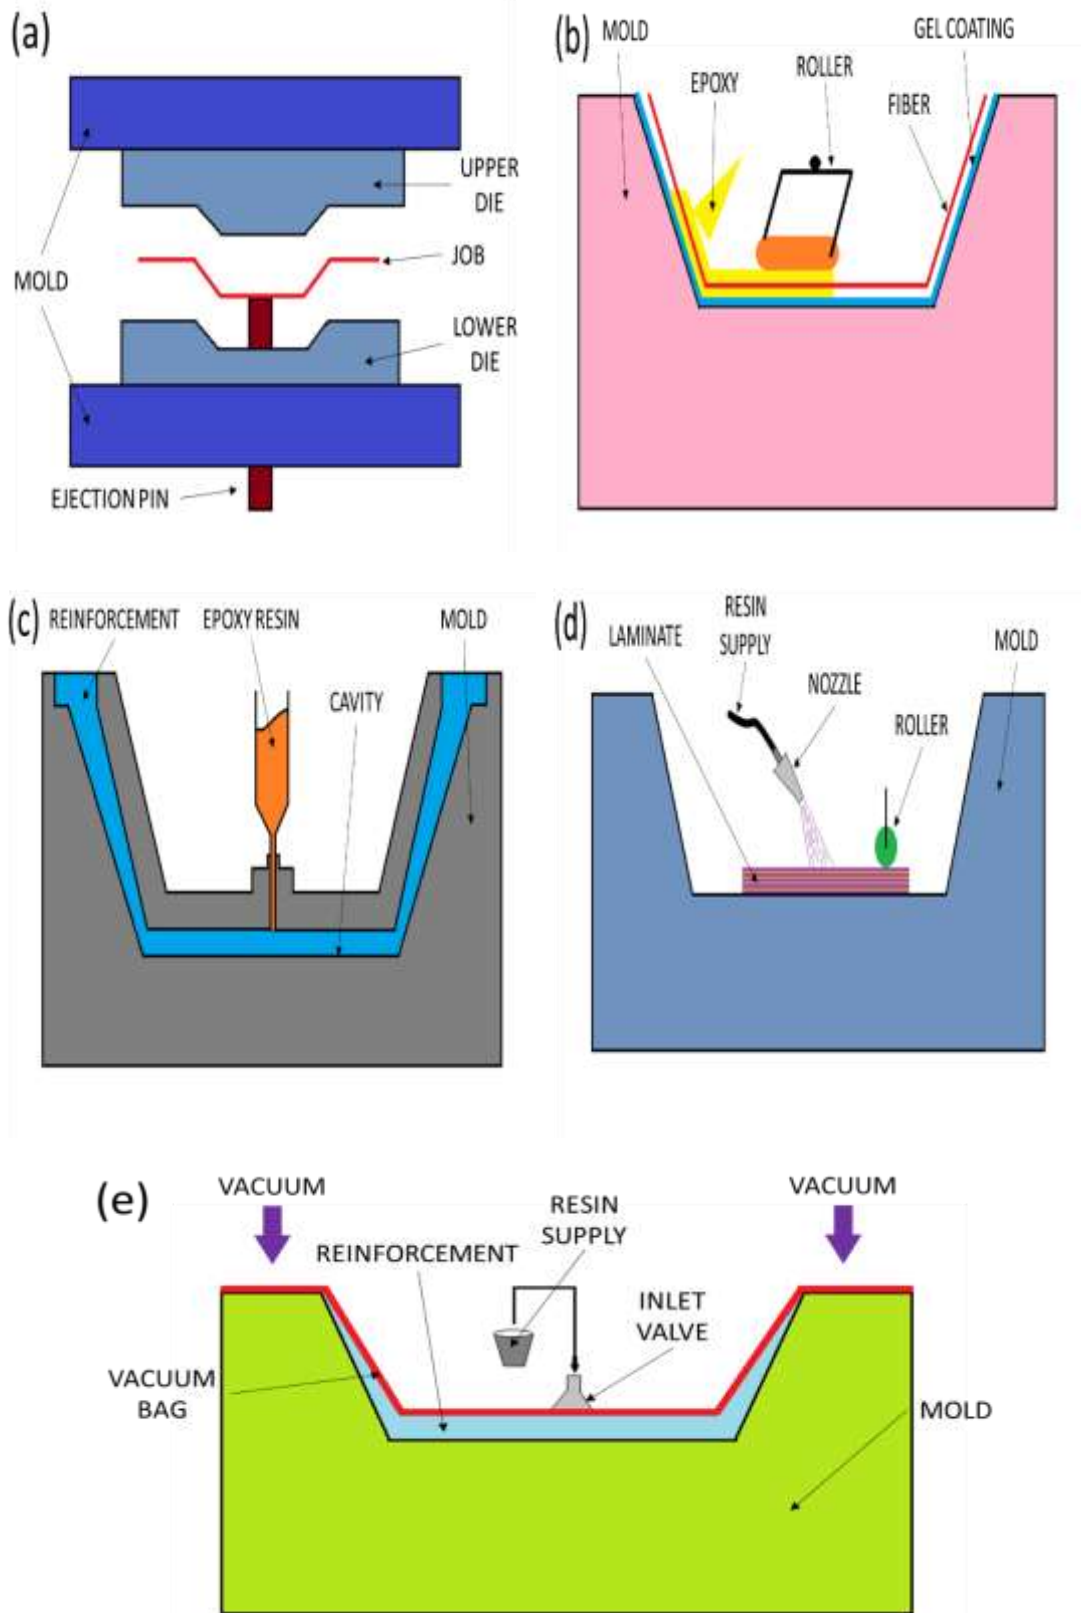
Fabrication method of polymer composite (a) Compression Molding, (b) Hand lay-up method, (c) Resin transfer molding, (d) Spray coating, and (e) Vacuum-assisted resin infusion.
